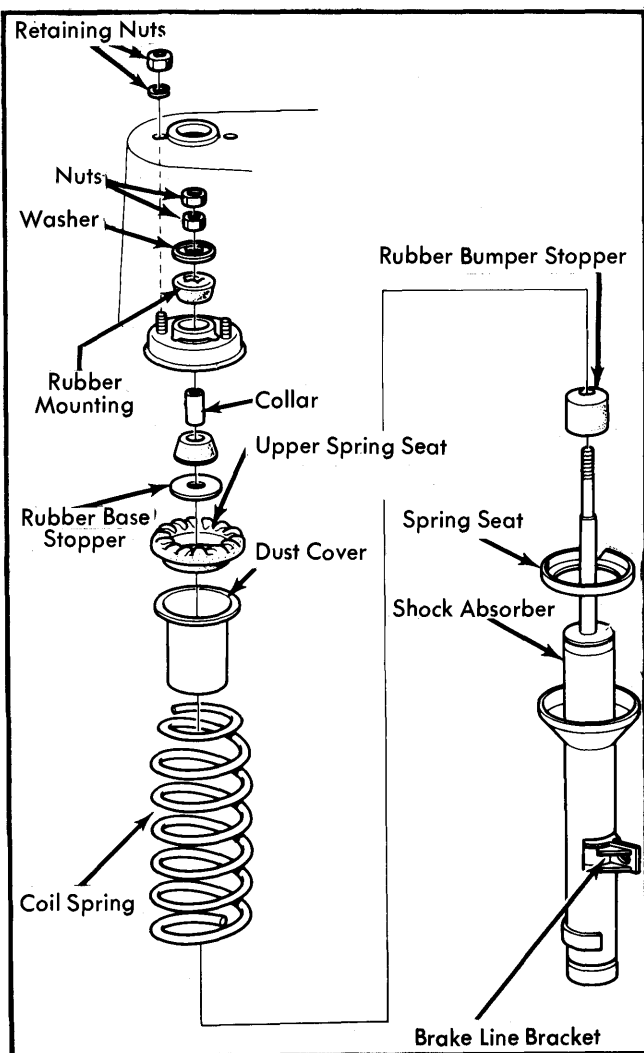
Exploded View of Accord Shock Absorber Assembly — Other Models Are Similar
